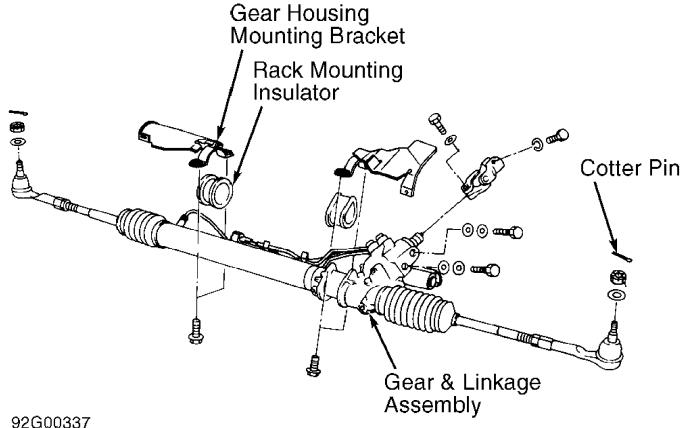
Removing Power Steering Rack Assembly (Q45) Courtesy of Nissan Motor Co., U.S.A.
